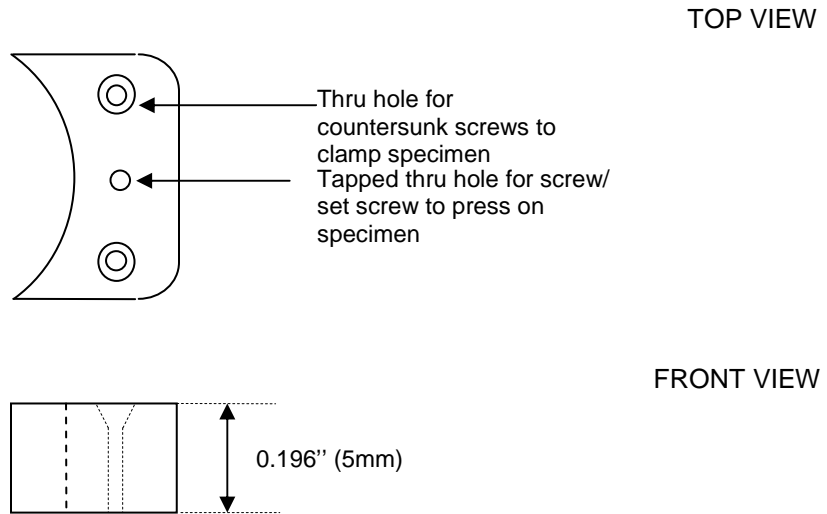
Top and front view of the specimen clamp for the liquid enclosure
